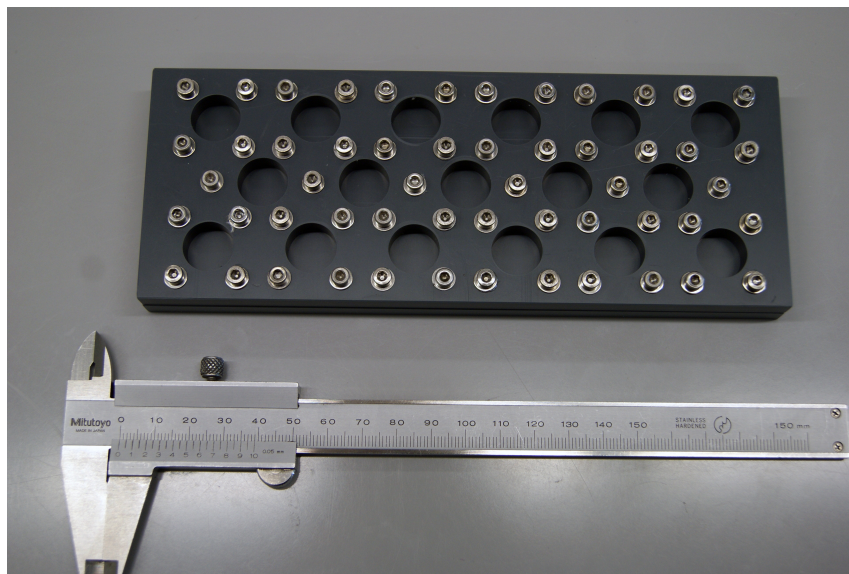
Moulds used for the PDMS production. The holes are 9 mm deep and have a diameter of 15 mm. The backplate can be removed so the discs can be removed quite easily from the moulds.
